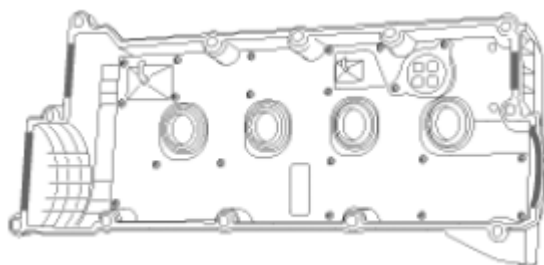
Identifying Cylinder Head Cover Gasket And Cylinder Head Cover
